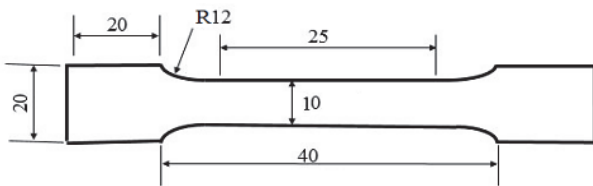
Tensile test specimen as per ASTM D412 (Type A)
